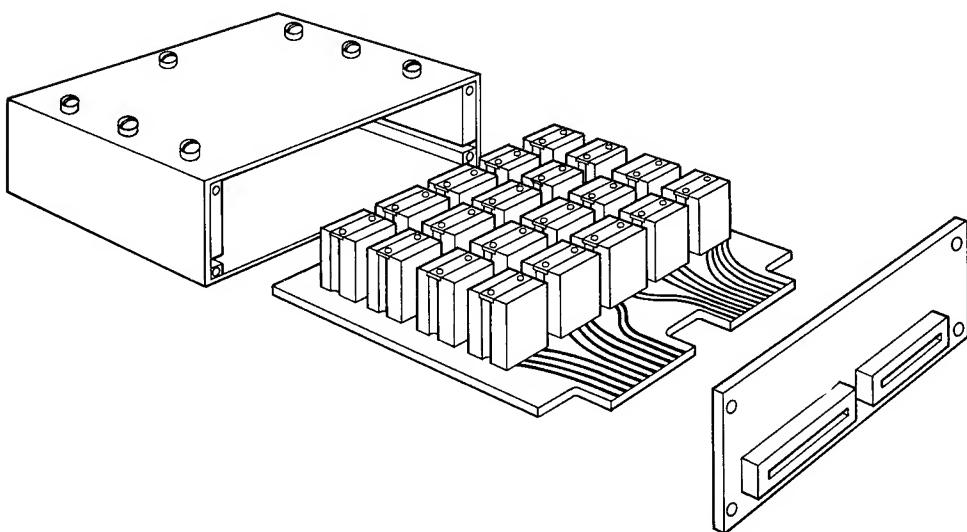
Example of Design No. 3 connectors used in an electronic assembly.
